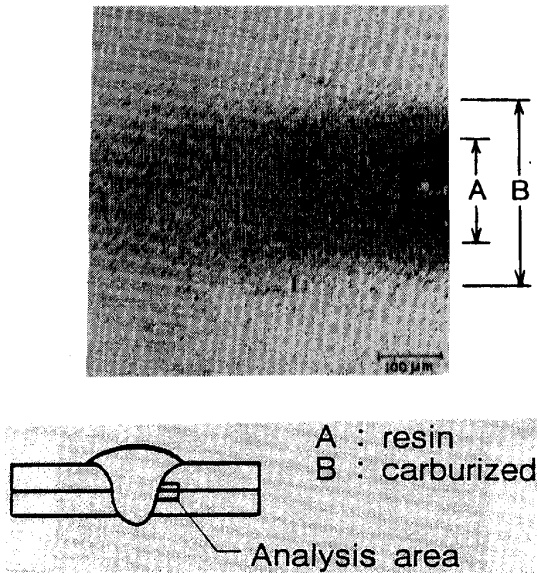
Carburized area detected by X-ray mapping method in arc-welded damping steel joint.
